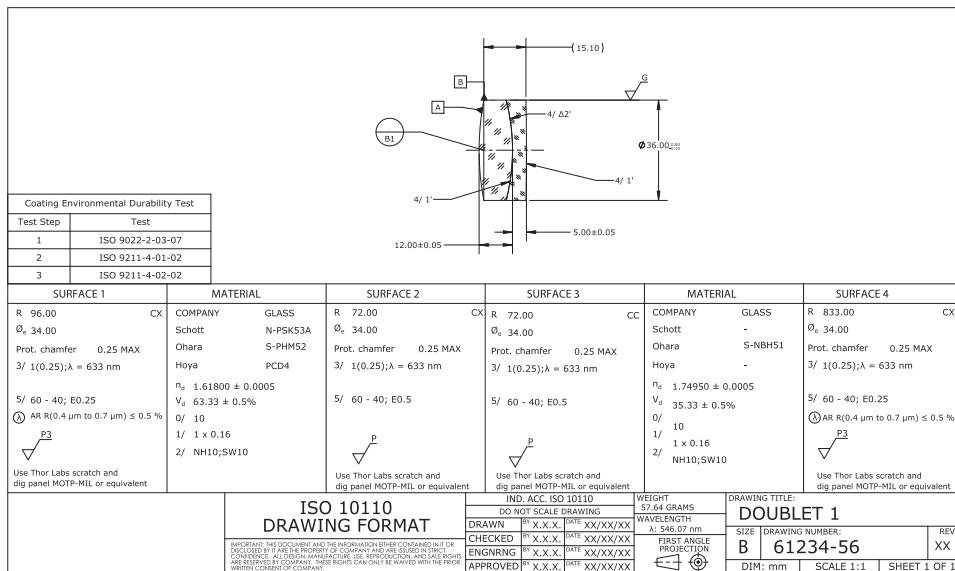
Optical system sample drawing for elements 1 and 2 using the ISO 10110 doublet drawing format.
